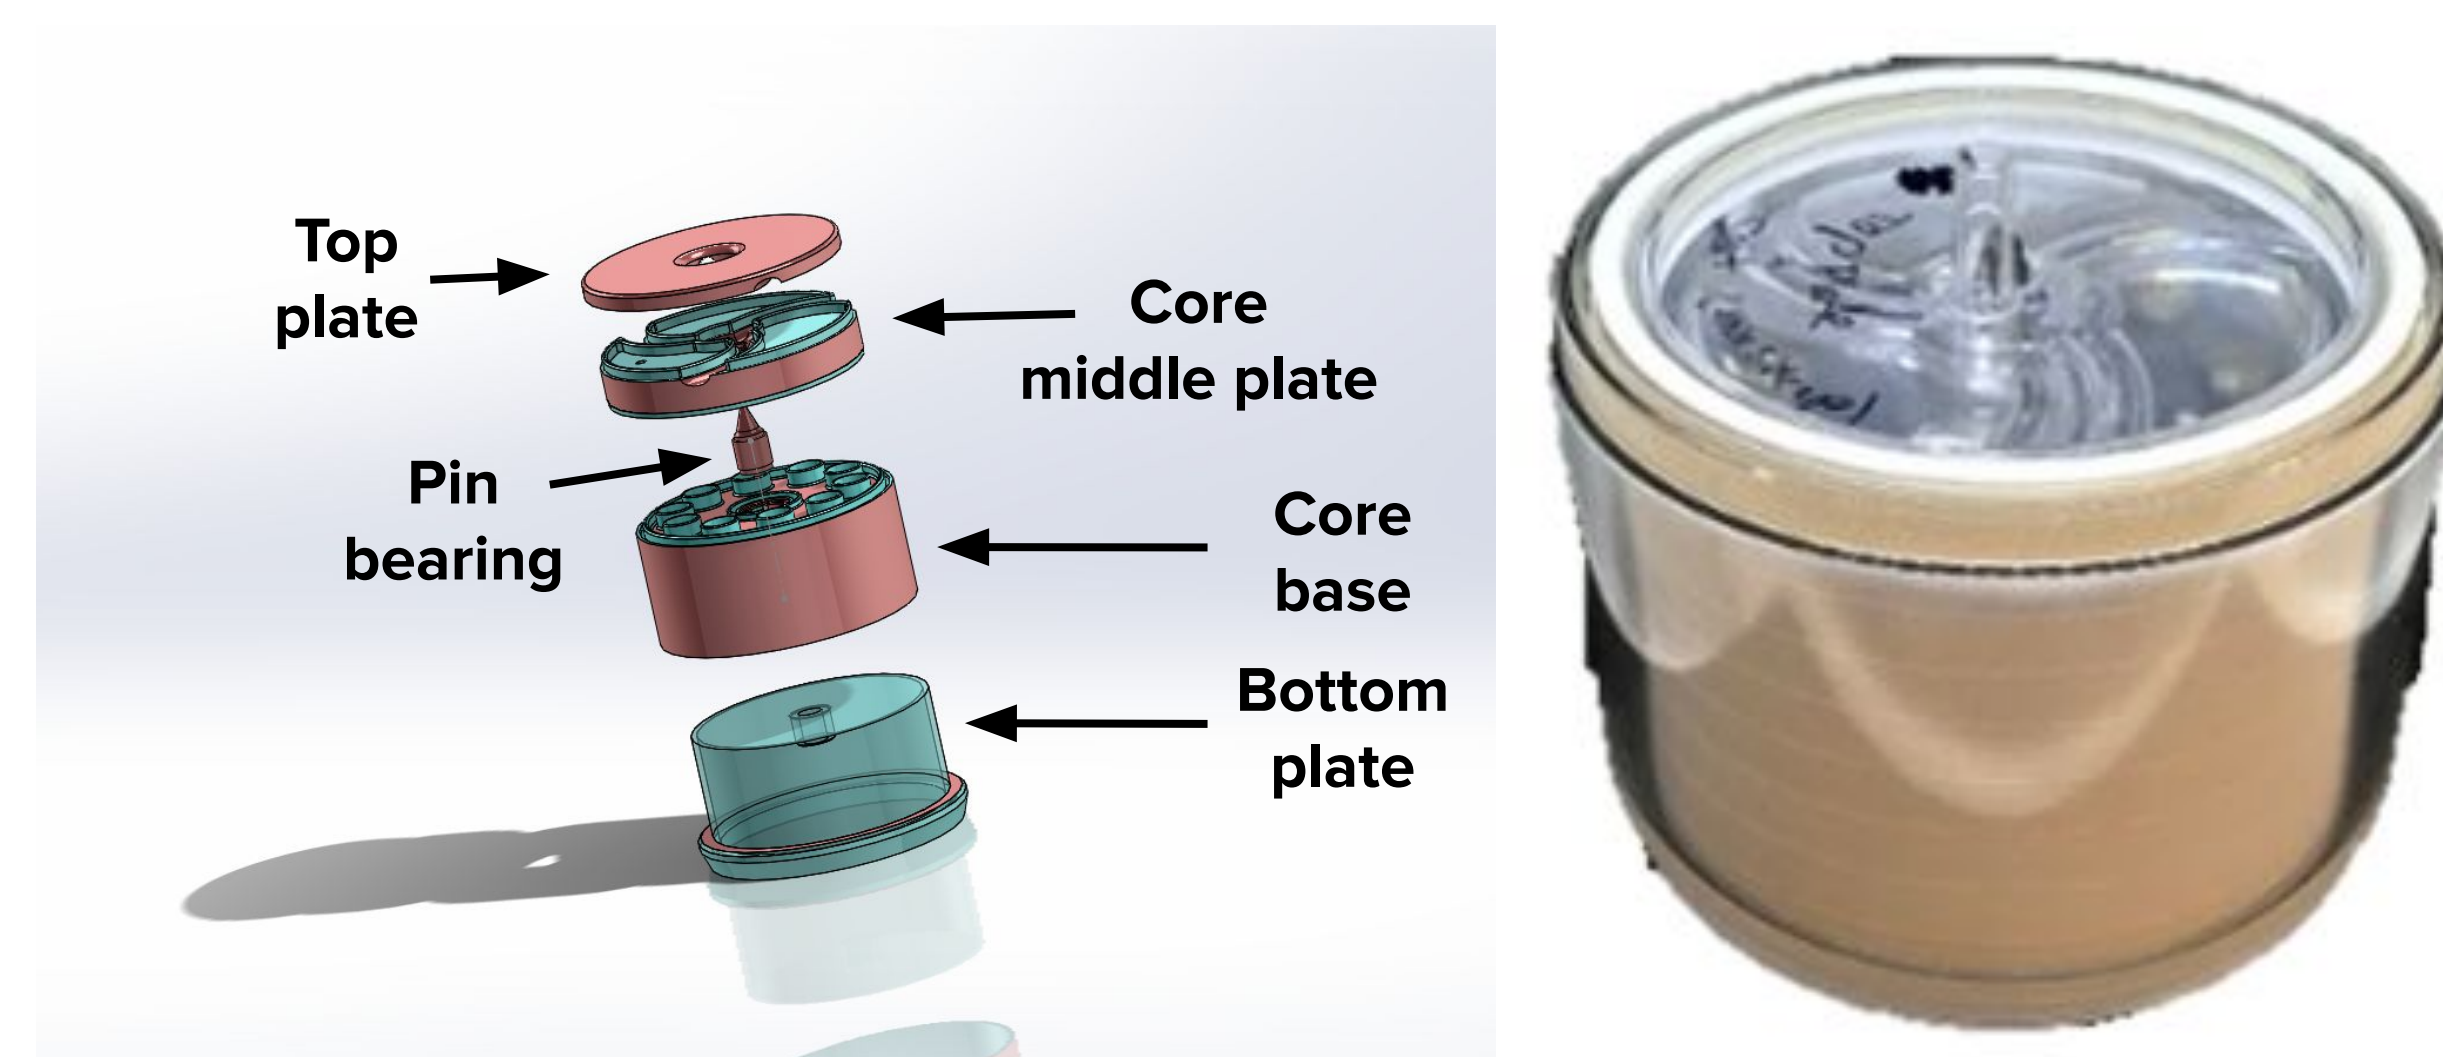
The exploded view of the redesigned cartridge (left) and the finished cartridge after all of the parts have been fabricated and assembled (right).
